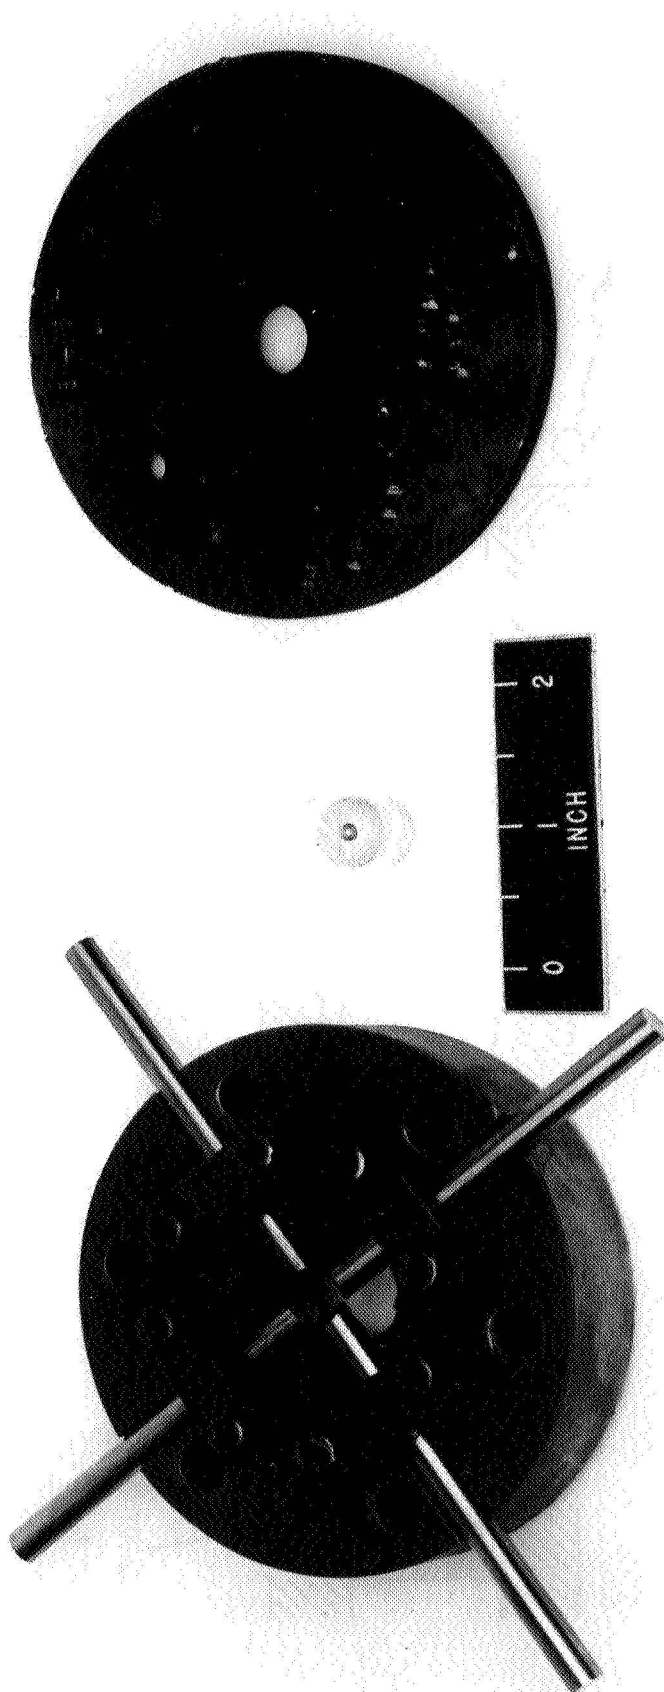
STRIPPER PIN ASSEMBLY, SABOT WITH PROJECTILE, AND SABOT TRAP
